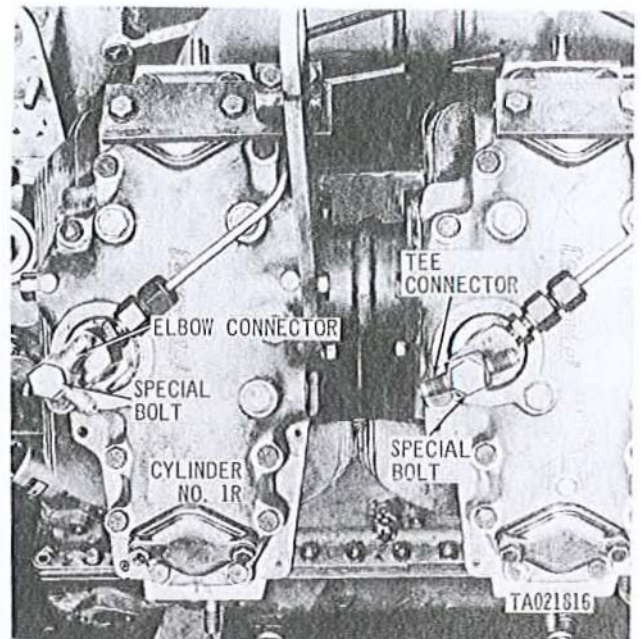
Removing or installing fuel injector nozzle, fuel tube elbow and tee connector, and special bolts.
